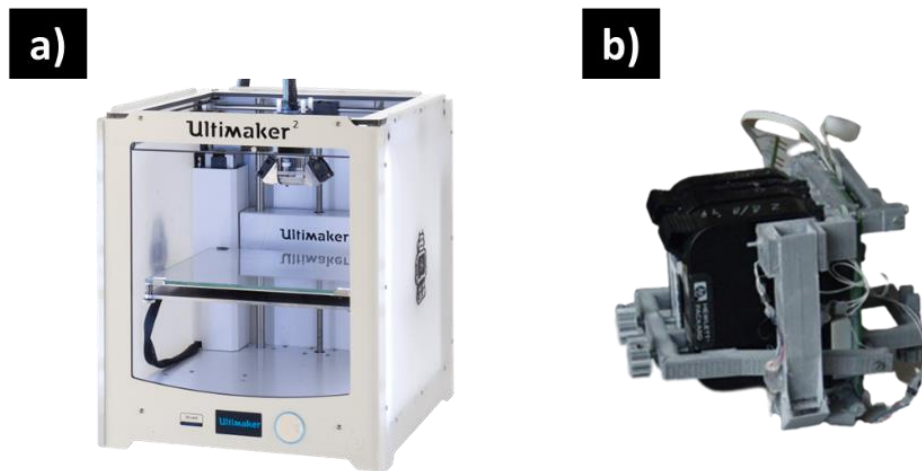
Components of custom-built printer a) Ultimaker 2 and b) Colorpod assembly.
